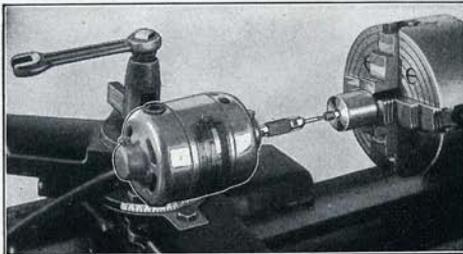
Internal Grinding Attachment. Cat. No. 166. Price.....\$27.50
